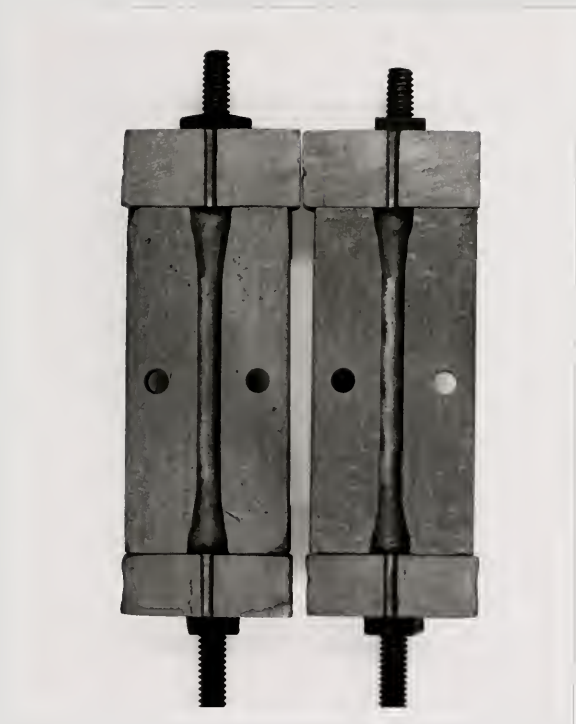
Split graphite mold used for presintering the sintering force specimens.
